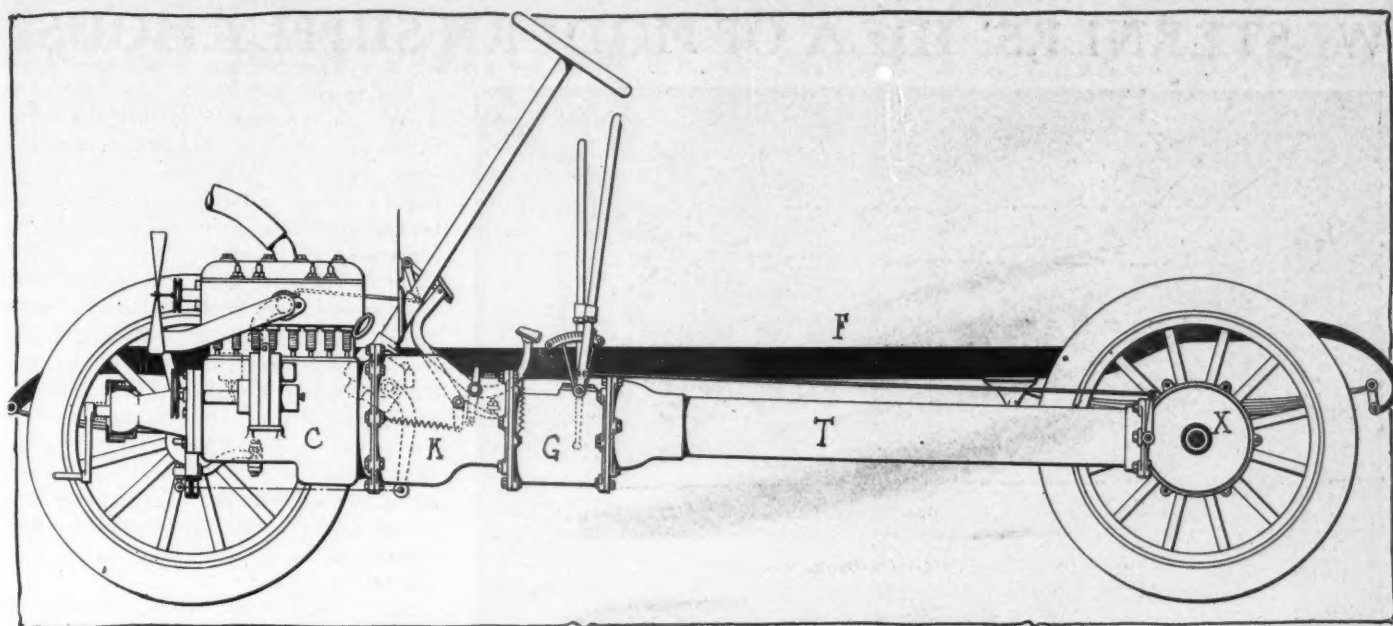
SIDE VIEW OF CAR WITHOUT A CHASSIS, ENGLISH IDEA REVIVED IN FRANCE
